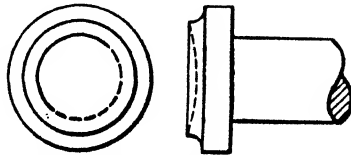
Dotted line shows the approximate outline of the sink mark that occurred when a thin head was molded with a thick stem. Increasing the head thickness helps eliminate the sink mark.
